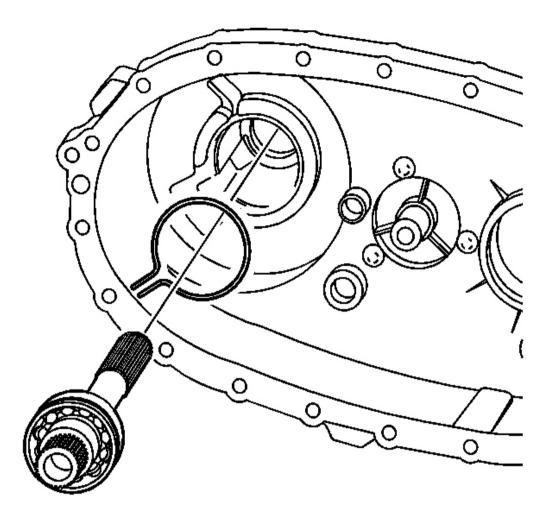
Identifying Rear Output Shaft & Outer Retaining Ring Courtesy of GENERAL MOTORS CORP.
